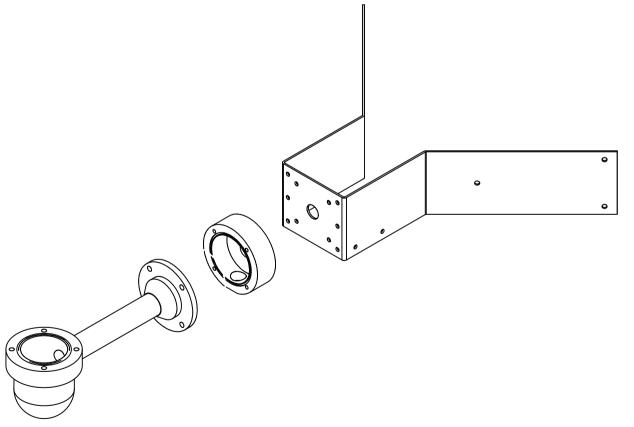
Typical corner mount (from left: Wall Mount Bracket (MIC-WMB), Shallow Conduit Adapter (MIC-SCA), and Corner Mount Bracket (MIC-CMB))
